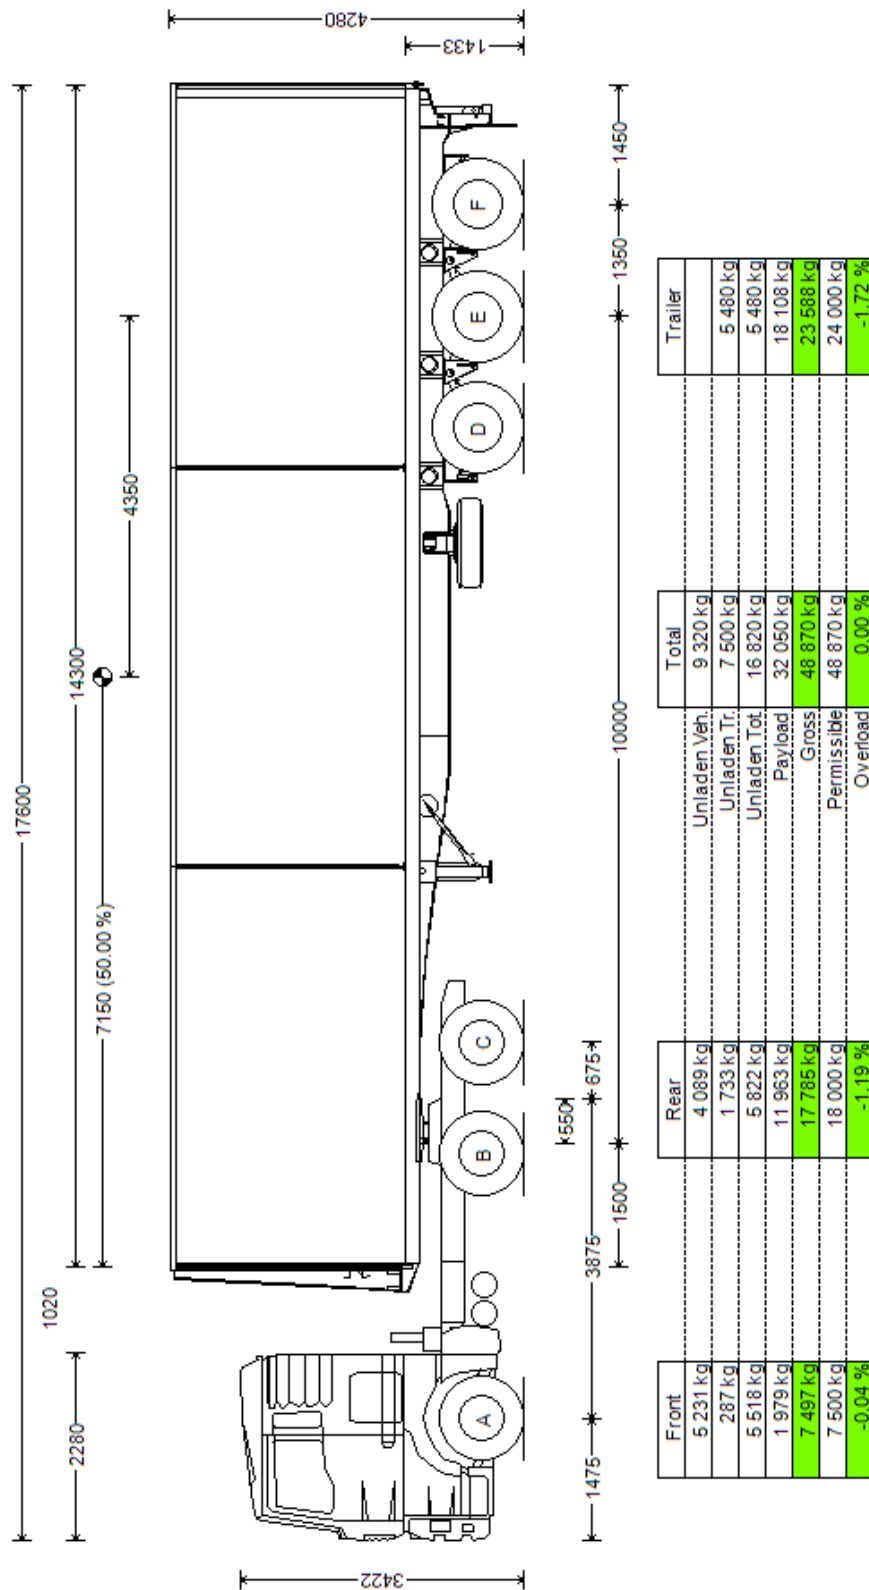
Layout dimensional drawing of Side curtain semi-trailer
